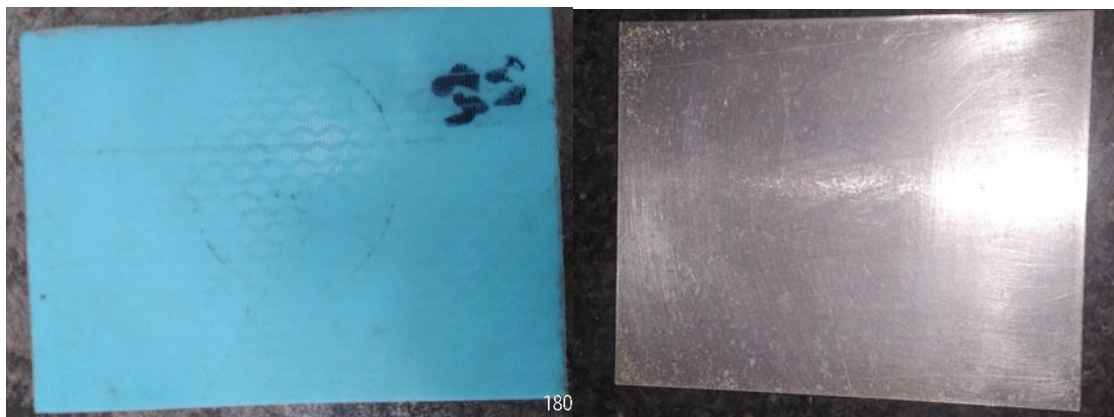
7 Workpiece material samples (a) polymer (b) Aluminum alloy
